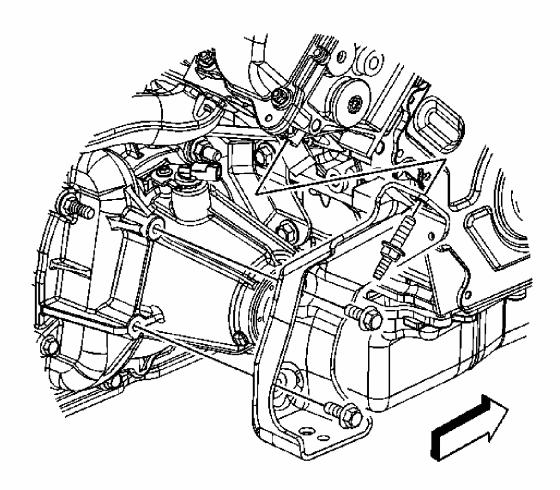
Identifying Right Engine Mount Bracket Courtesy of GENERAL MOTORS CORP.
